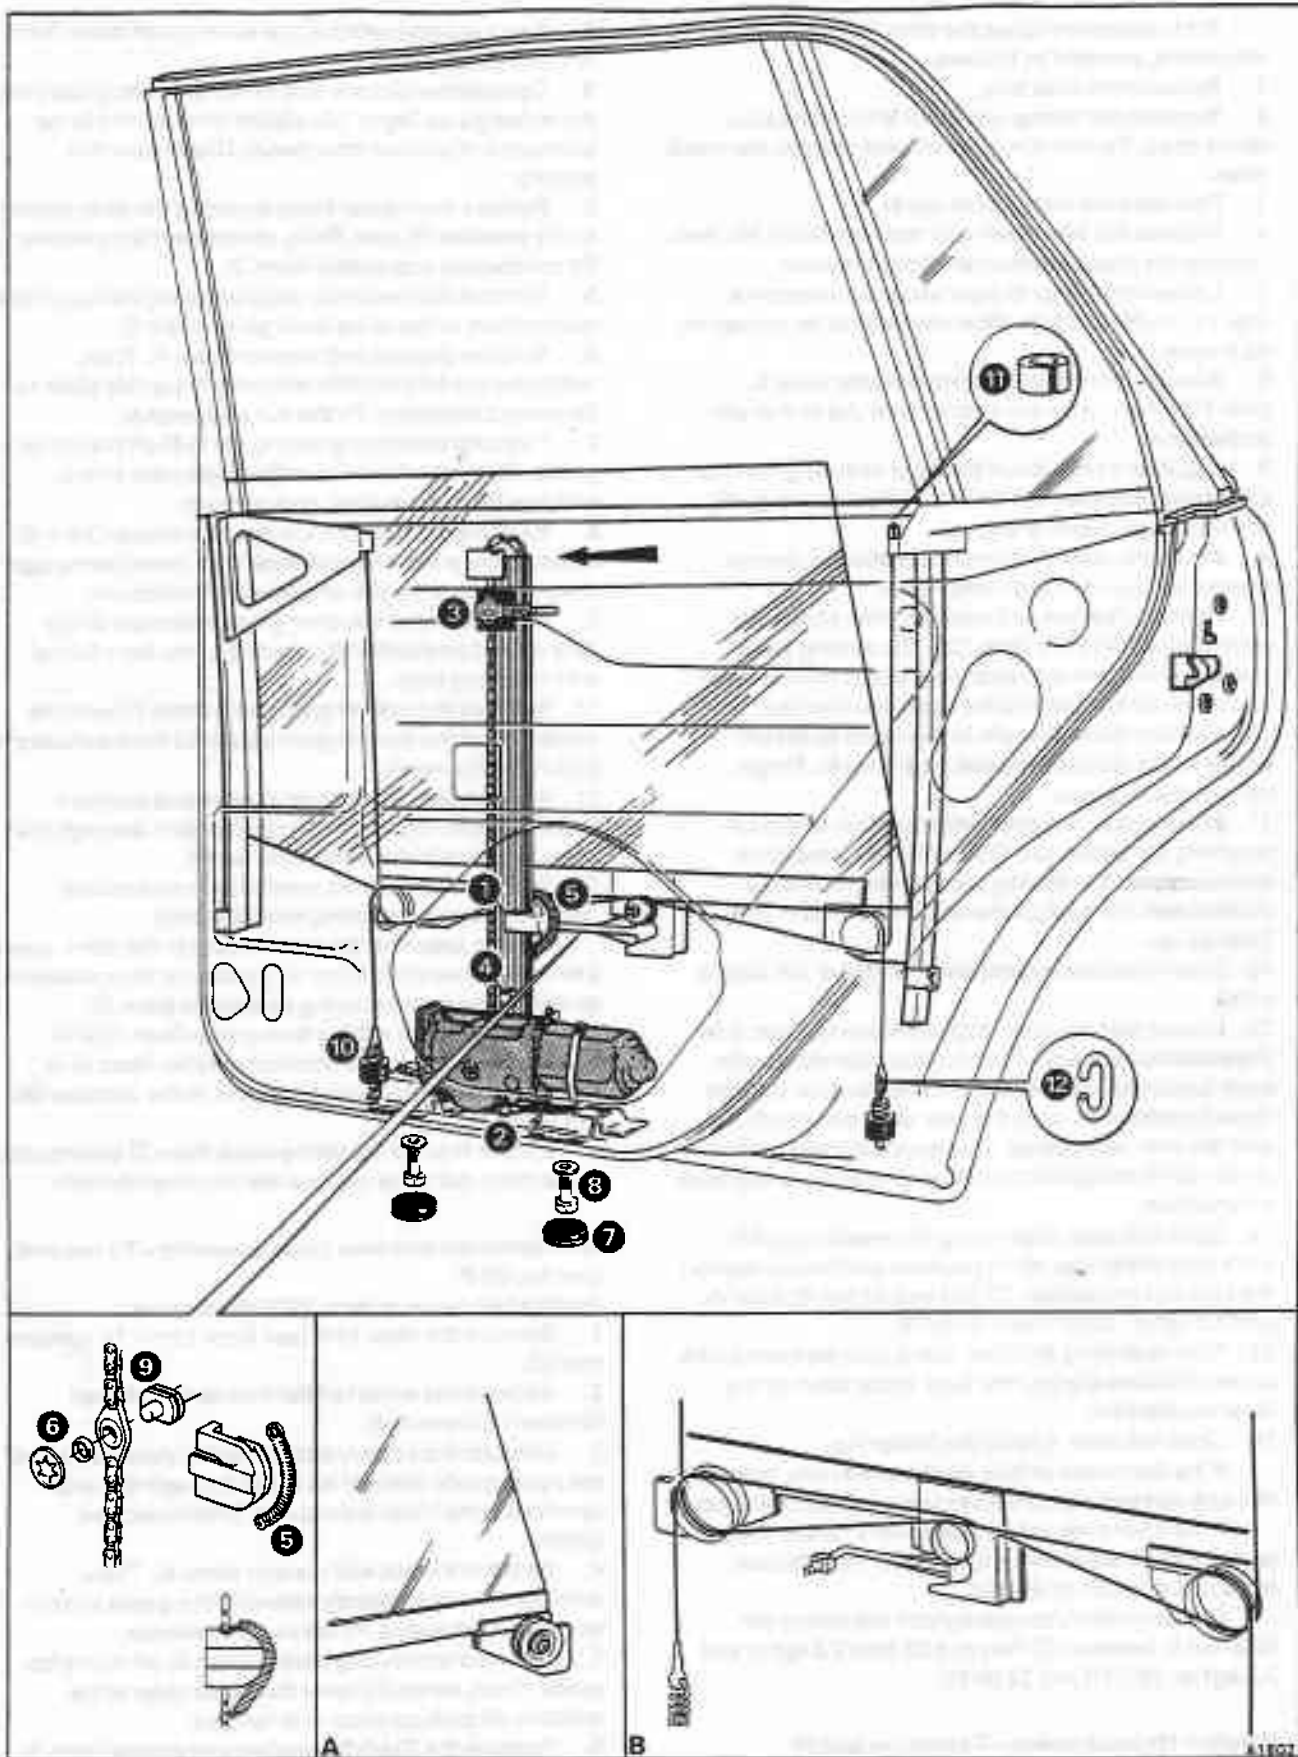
Window lift mechanism, door glass, and wire guidance assembly and fittings
